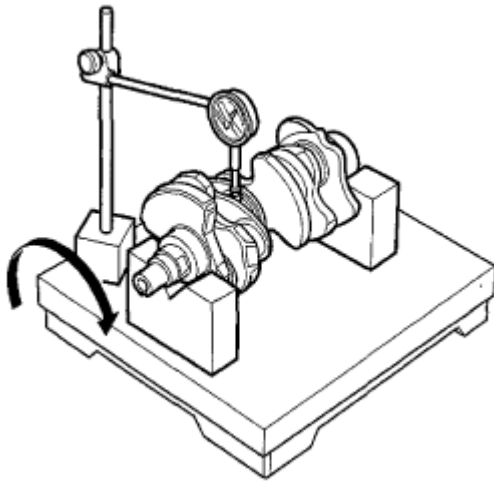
Check Main Journal Runout With Crankshaft Supported On V-Blocks
